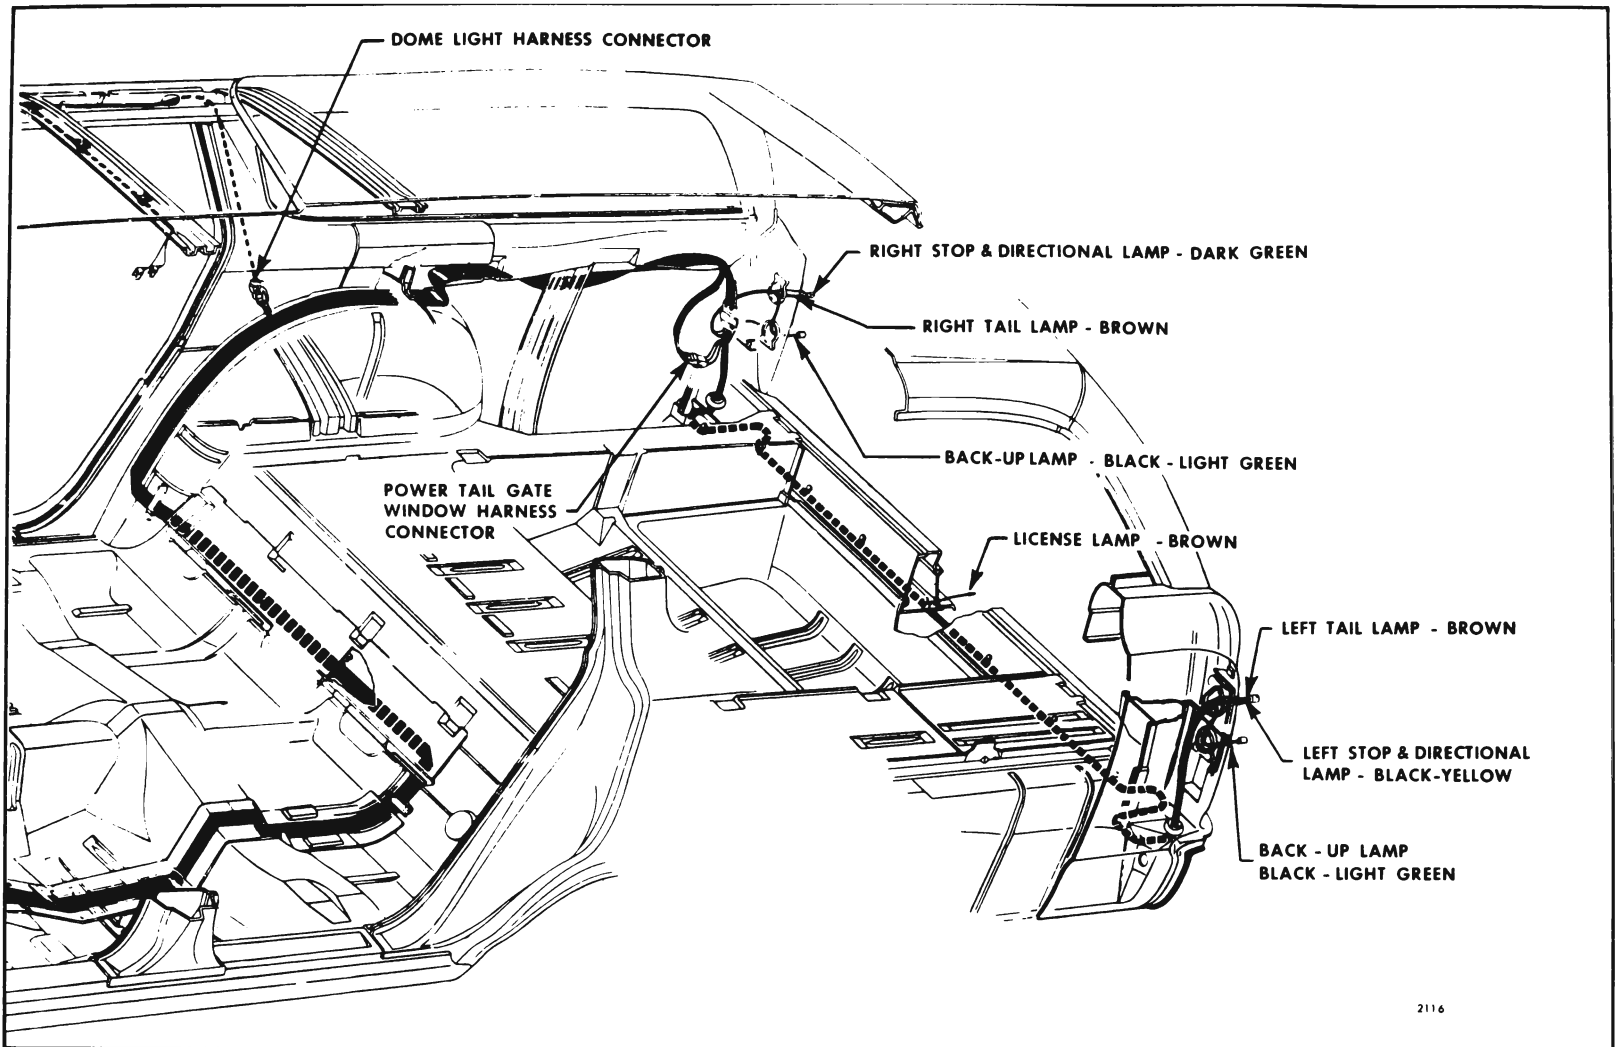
Right Side and Rear End Wiring - Chevrolet, Pontiac, Oldsmobile "A" Bodies
